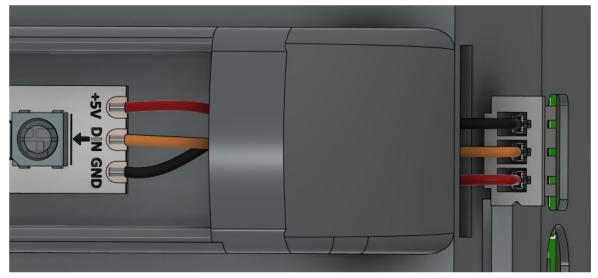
Angled view of RGB connector soldered to the RGB LED strip.
